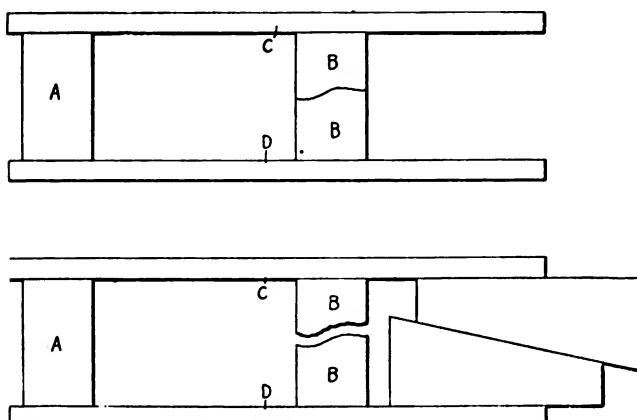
How the casting may be sprung by wedges for welding
